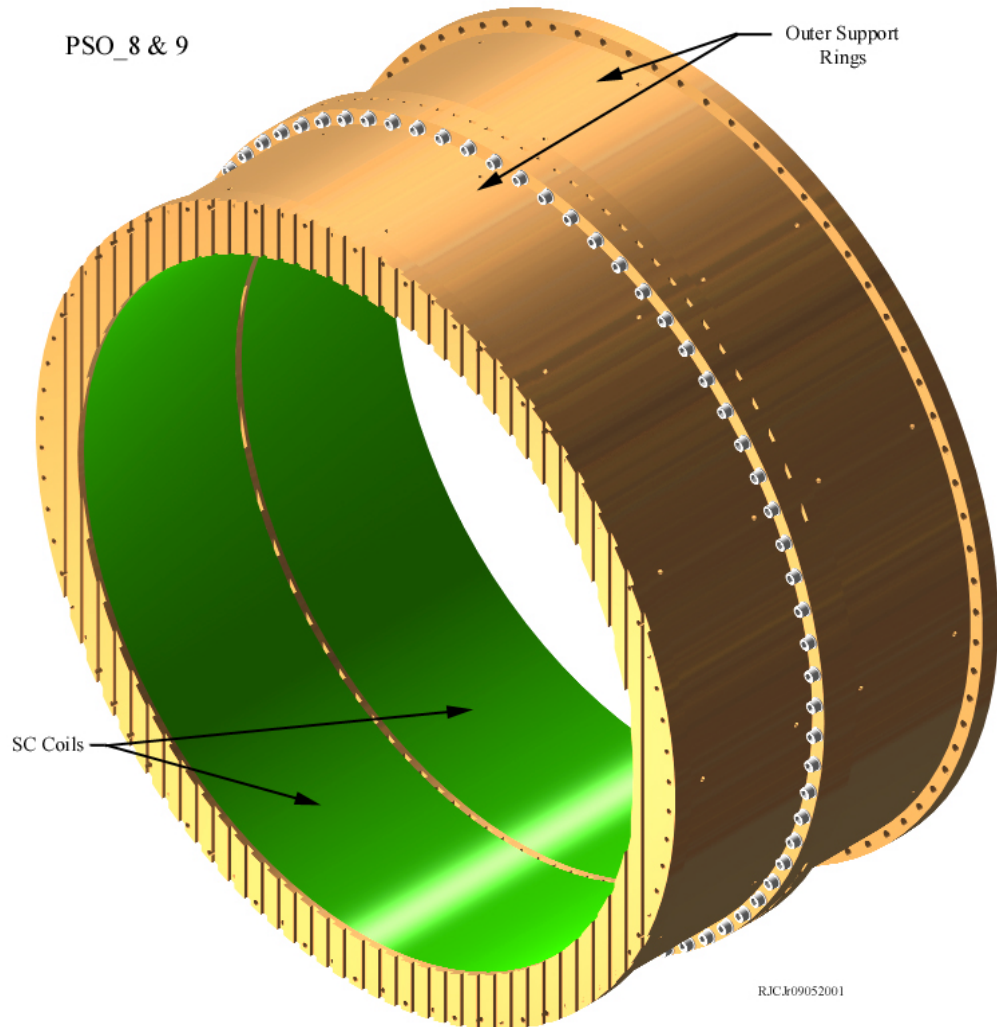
Production Solenoid Mandrel showing He bubble vent grooves, and flange bolting. This is an aluminum 6061T6 forging with all surfaces machined.
